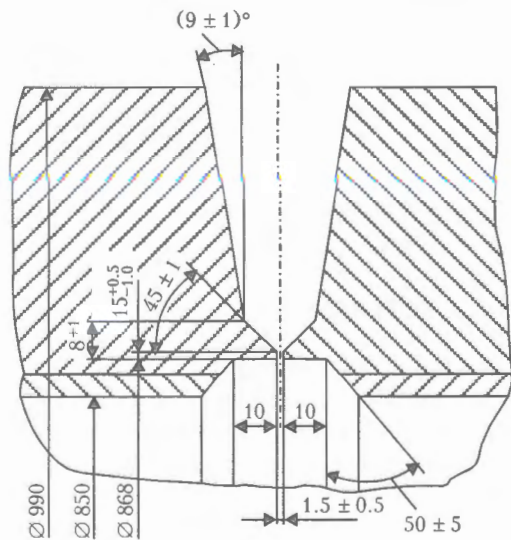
Schematic of standard groove in welded joints made by the AAAW method using non-consumable electrode and welding wire
